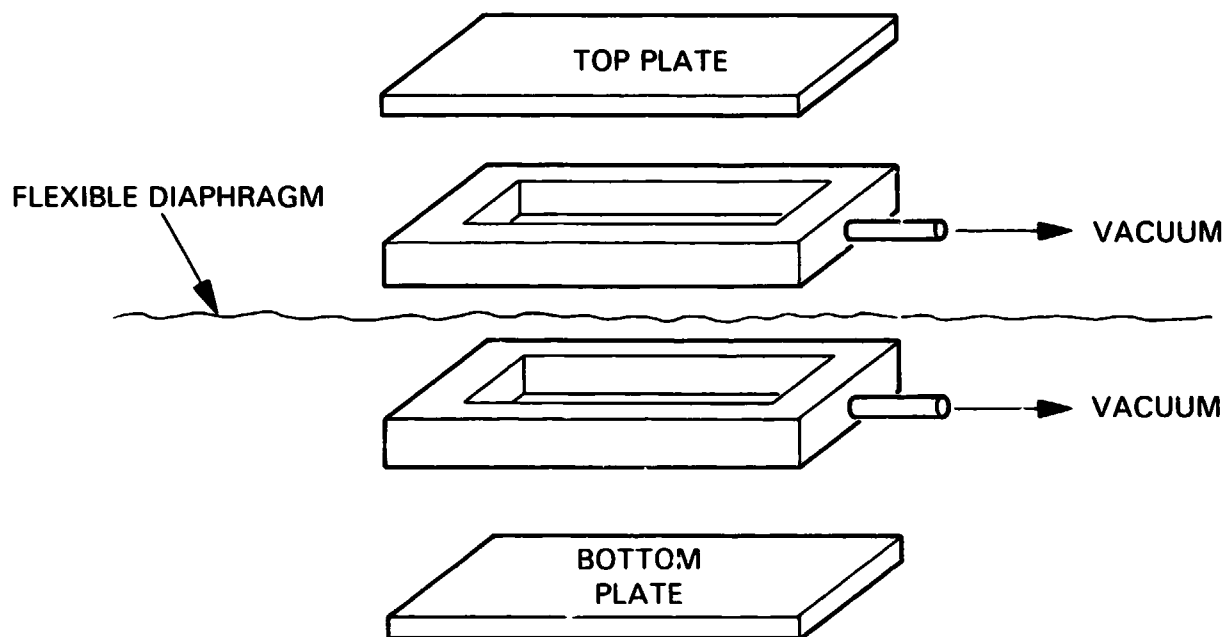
Laboratory-Scale Double Vacuum-Bag Fixture
